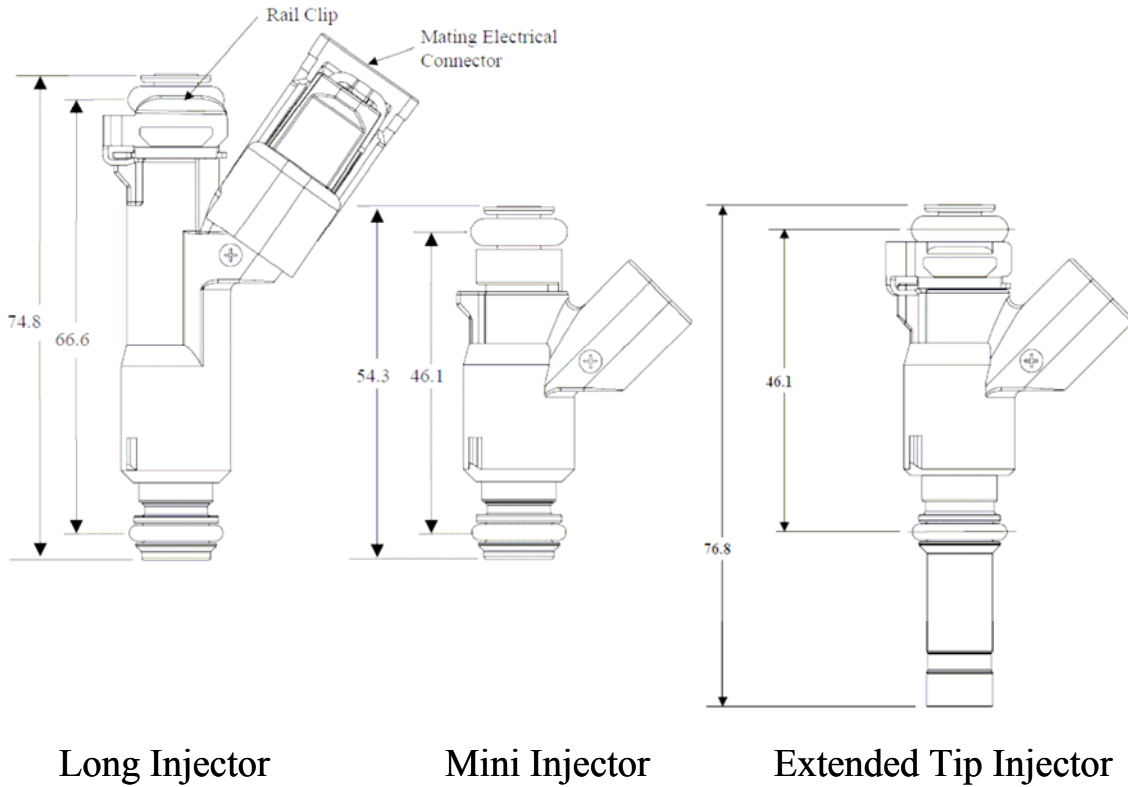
Multec 3.5 Fuel Injector Dimensions – Seal ring design. (For exact dimensions, refer to Delphi Injector Outline Drawing).
